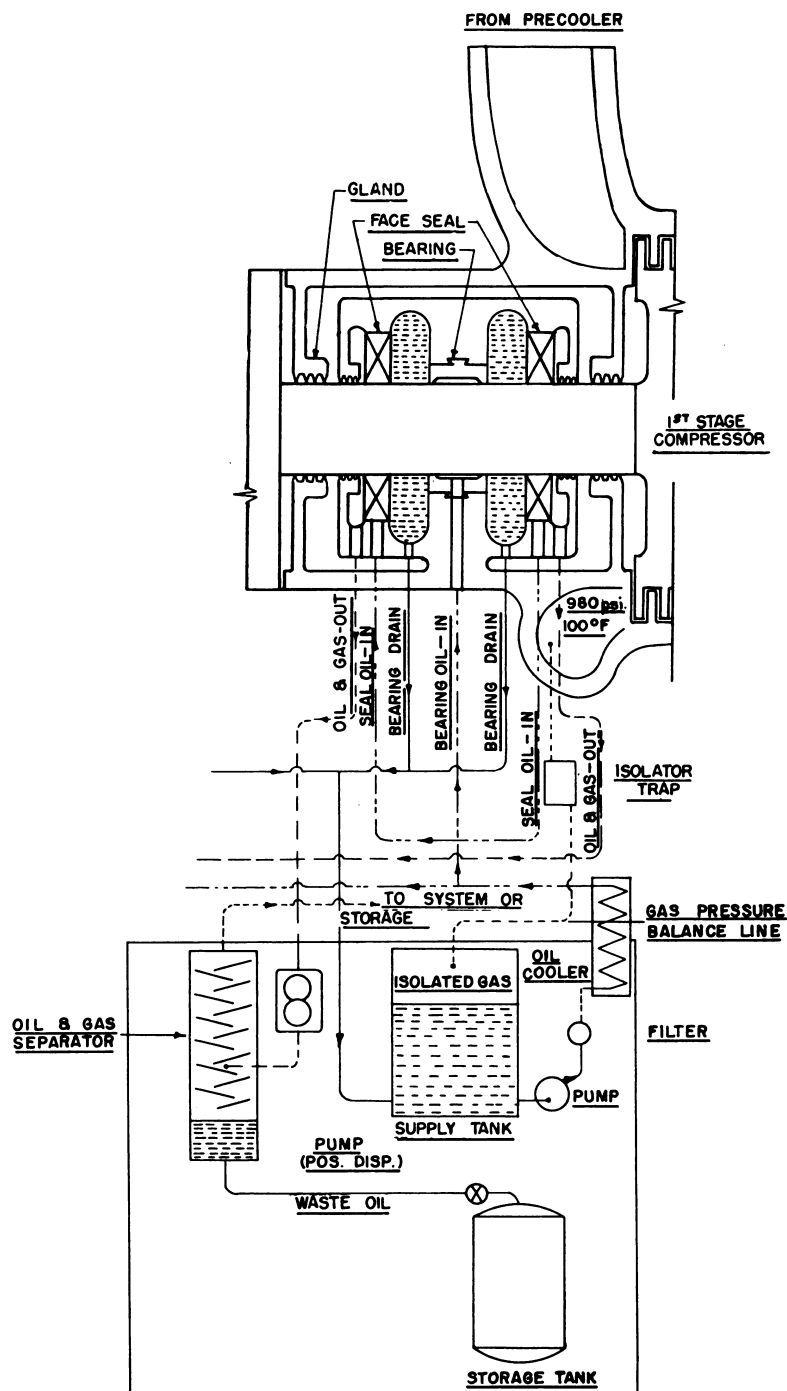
Oil-lubricated Journal-bearing System for High-pressure Helium Gas Turbine. Reprinted from NP-1522, May 1, 1950.
